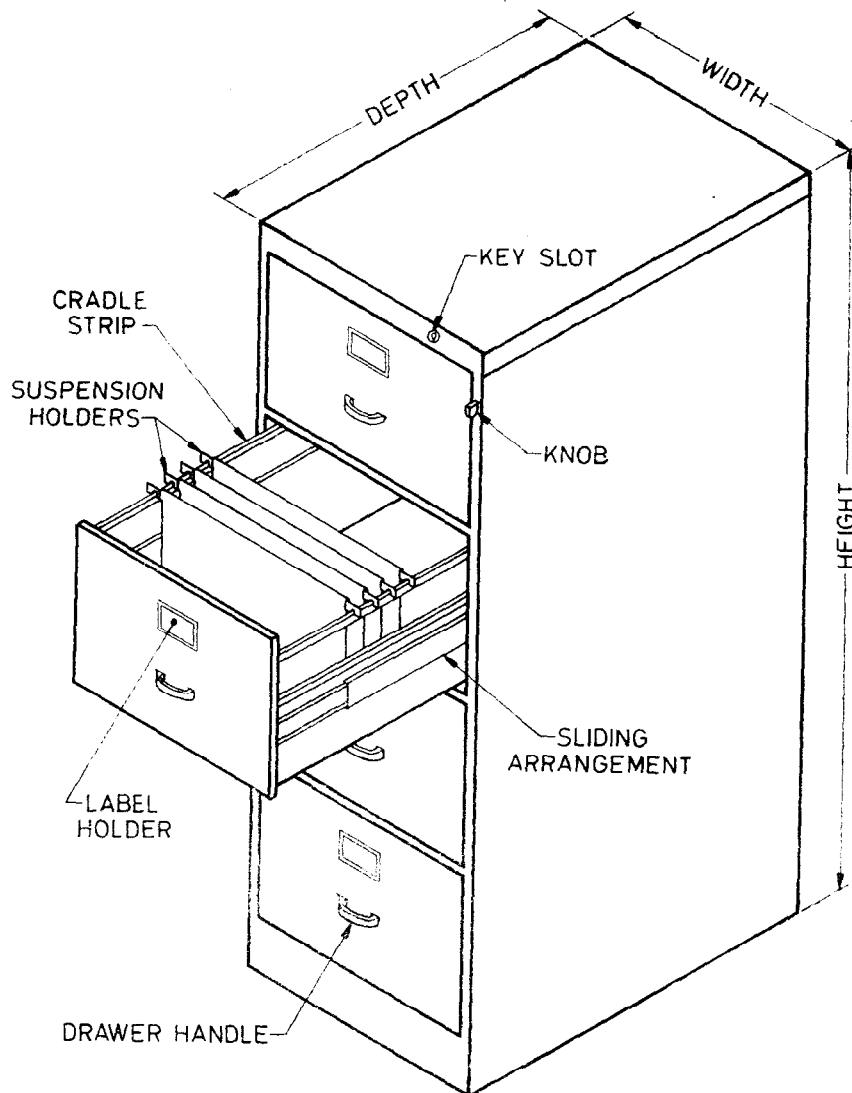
TYPICAL SKETCH OF A FOUR-DRAWER TYPE METAL FILING CABINET
